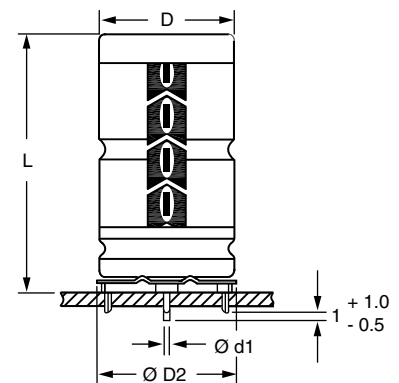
Mounting hole diagram and outline. Form MR: With mounting ring and pins
